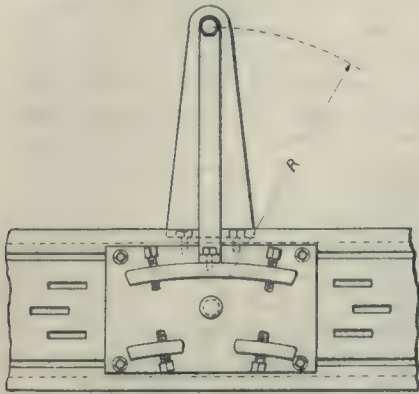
LINK PLANING DEVICE SHOWING SWINGING MECHANISM.
